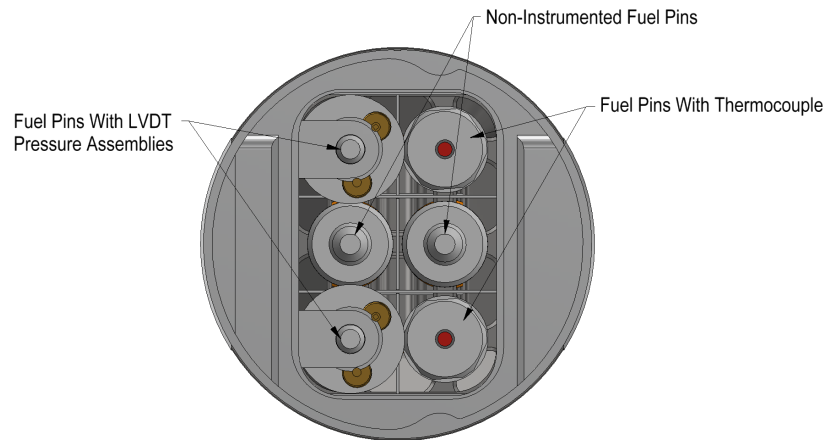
Loading arrangement of Tier 4 with instrumented and un-instrumented pins.
